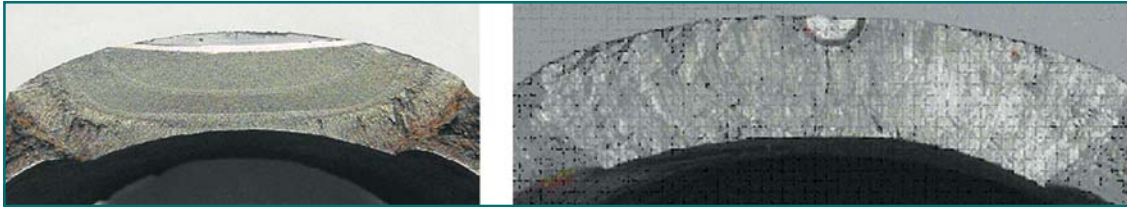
Fracture surface showing crack shape during fatigue crack growth
